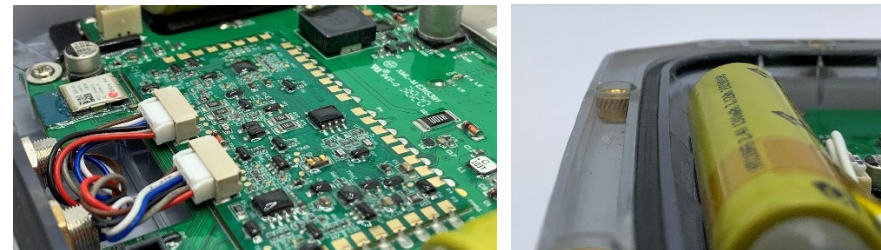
(a) Conformable coating for waterproofing PCBA with interesting PCB stacking design. (b) Rubber seal and inserts for opening
